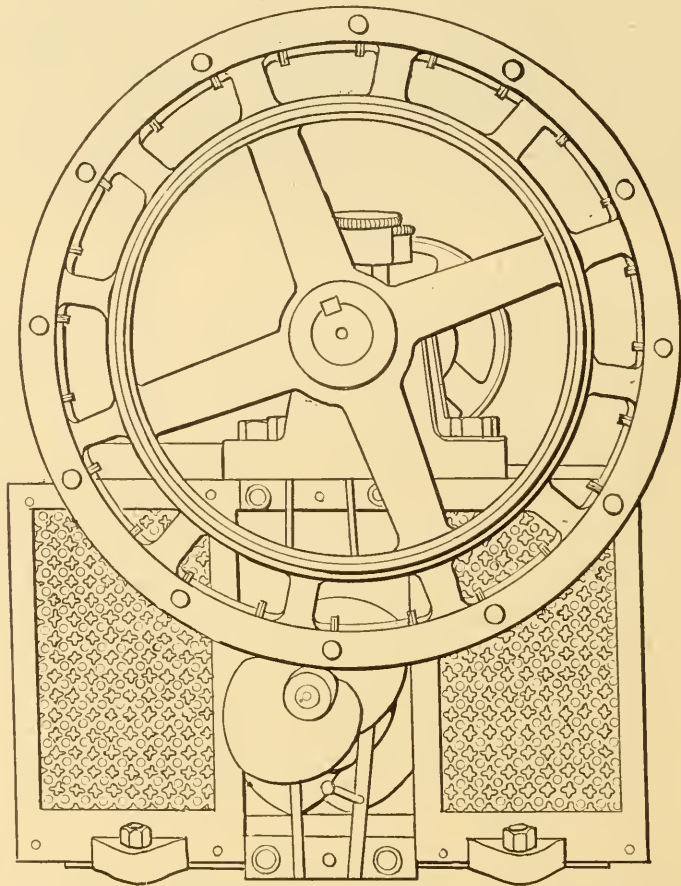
GRISSON GEARING, USING A THREE-TOOTHED PINION.
